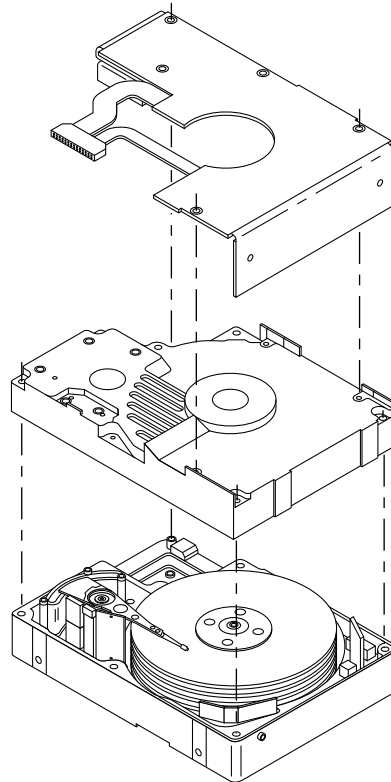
Barracuda 2, 2HP disc drive (exploded view)
